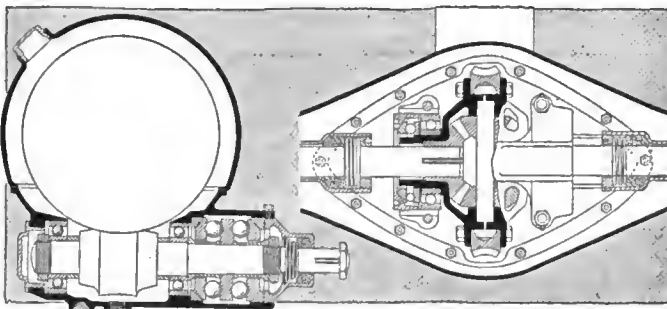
Details of the mounting of the gears and differential of American Ball Bearing Company's underneath worm-drive axle
